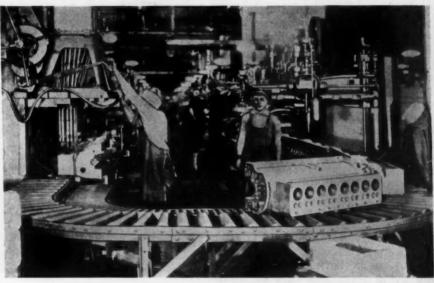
ROLLER CONVEYOR BETWEEN MACHINE-TOOLS
